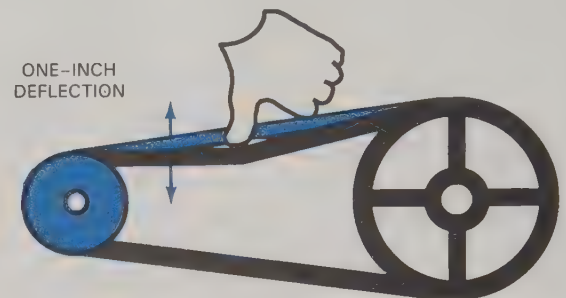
A properly tensioned V-belt should deflect about one inch when pressure is applied midway between the flywheel and motor pulley.
